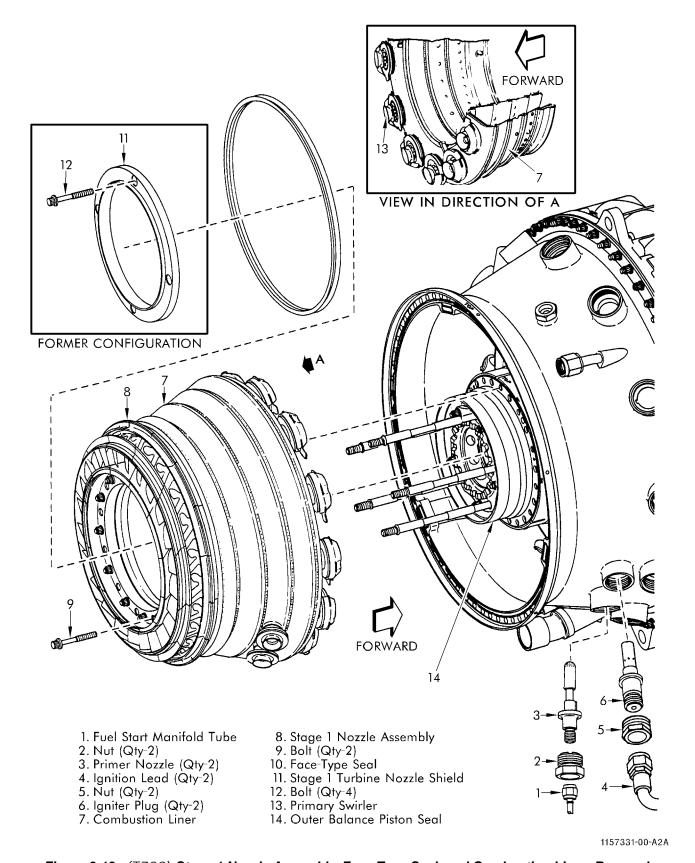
(T700) Stage 1 Nozzle Assembly, Face-Type Seal, and Combustion Liner; Removal
